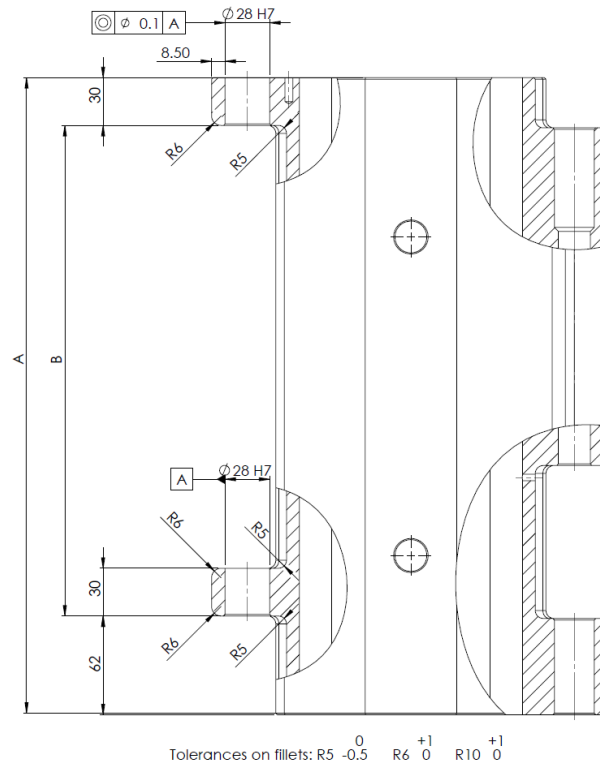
Manufacturing tolerances of a JibFlex module without bushings or taps.
